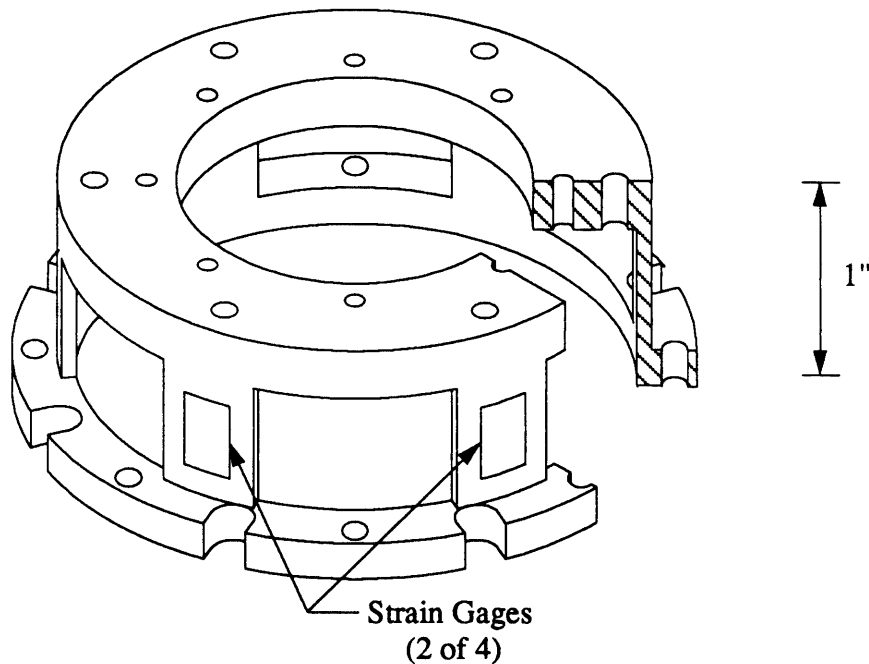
Isometric Drawing of Wrist Torque Sensor
